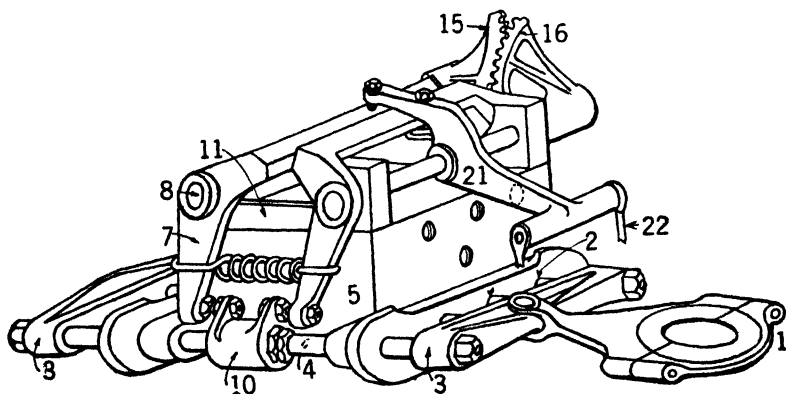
Perspective View of Busch-Sulzer Marine Type Fuel Pump
